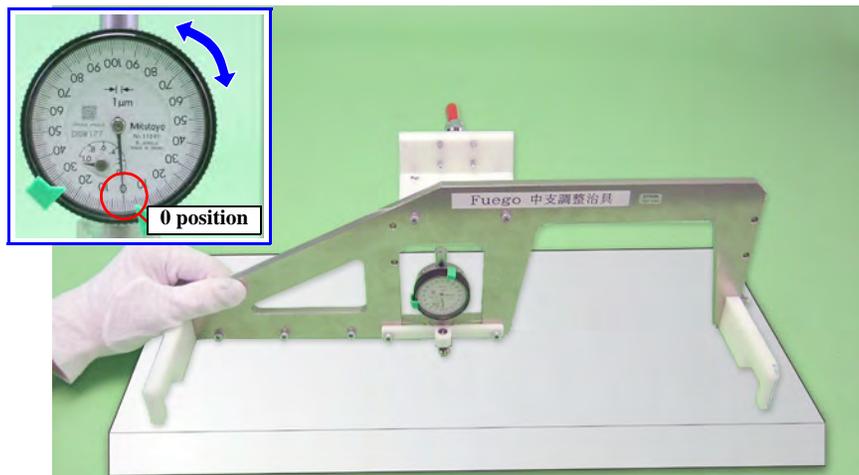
Setting the PF Roller Shaft Position Adjustment Jig (1)
